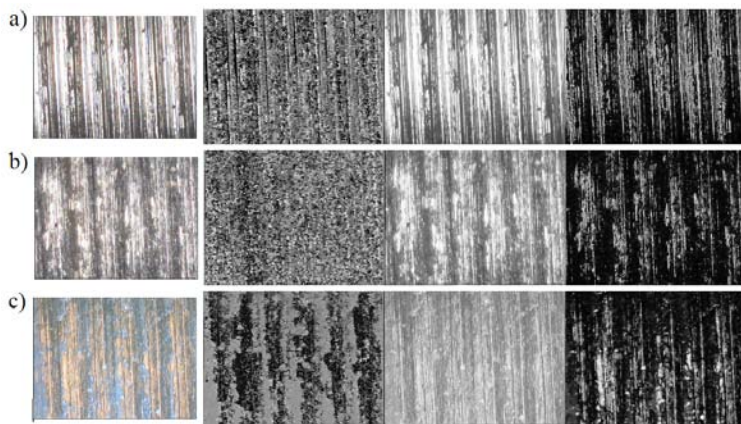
Machined surface image and its HLS representation: a) after turning with two-sided lighting; b) after burnishing rolling with two-sided lighting; c) after burnishing rolling with four-sided lighting.
